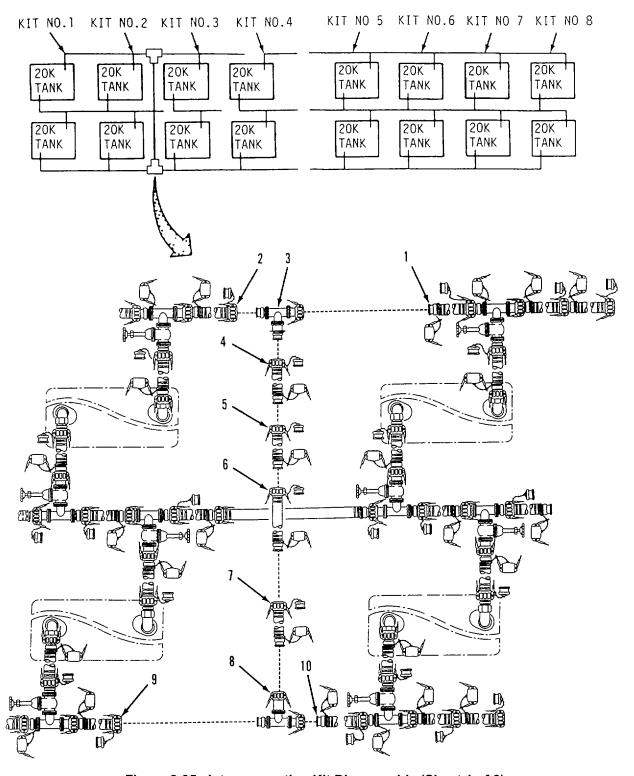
Interconnection Kit Disassembly (Sheet 1 of 2).
